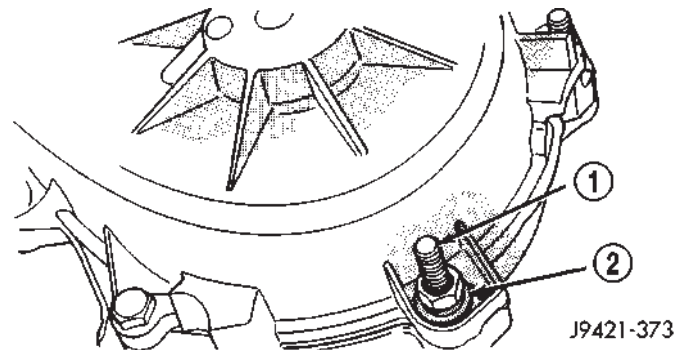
Washer Installation On Case Stud And Dowel Bolts
